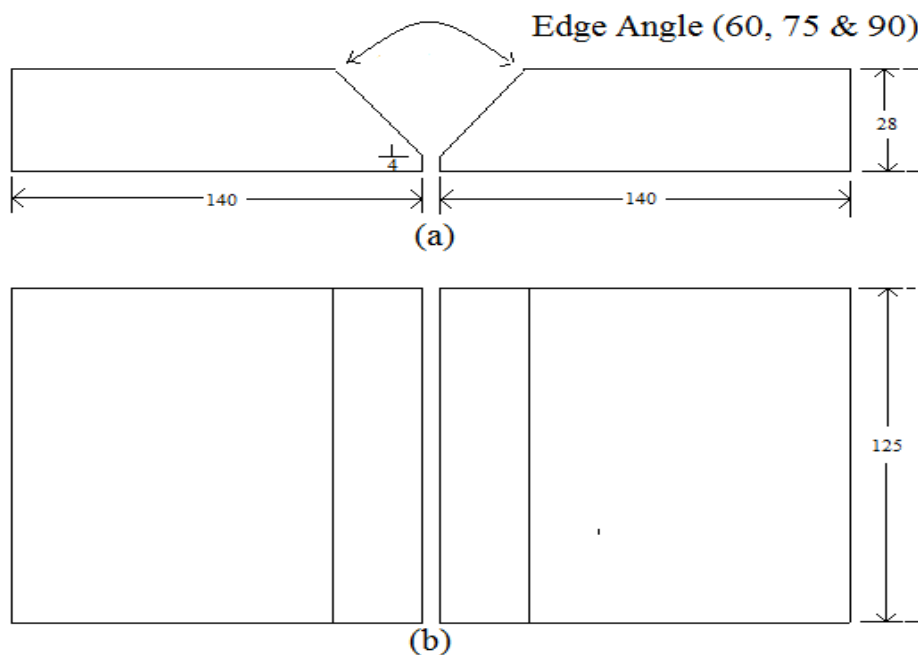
Groove geometry (a) front view and (b) top view (all dimensions are in mm)
